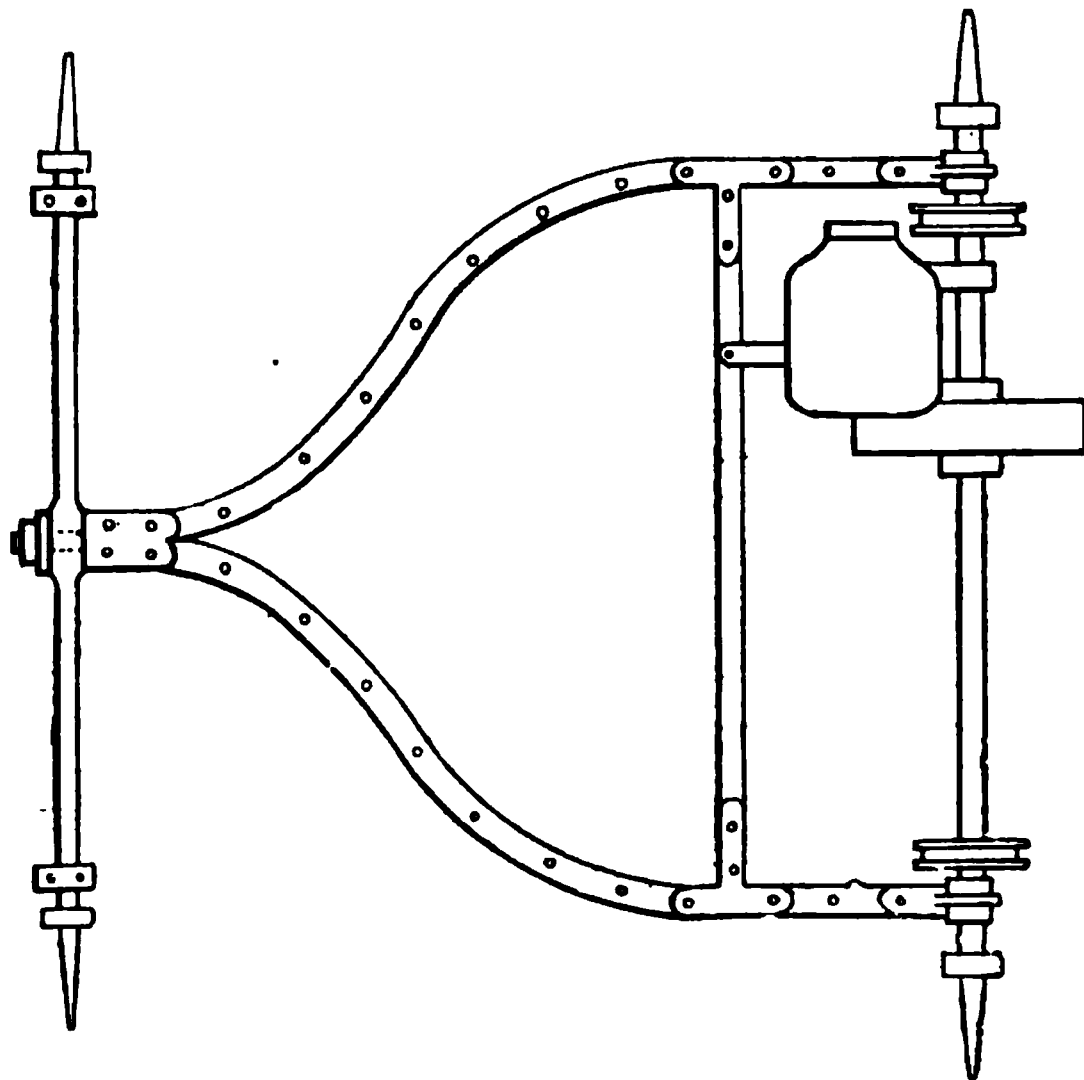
Angle Iron Underframe with swivel joint at centre of front axle.
